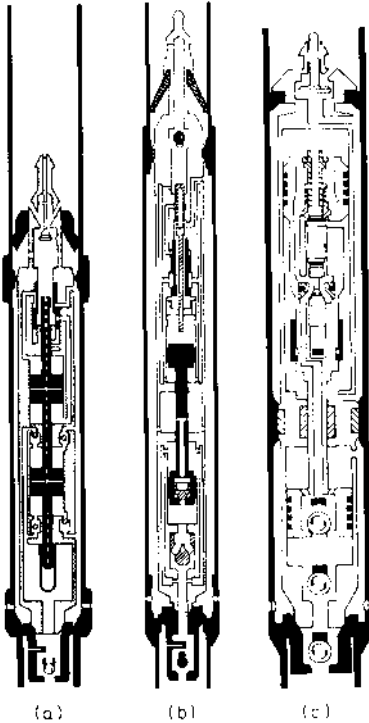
Designs of subsurface hydraulic pumps: (a) double-acting, (b) balanced, (c) single-acting
